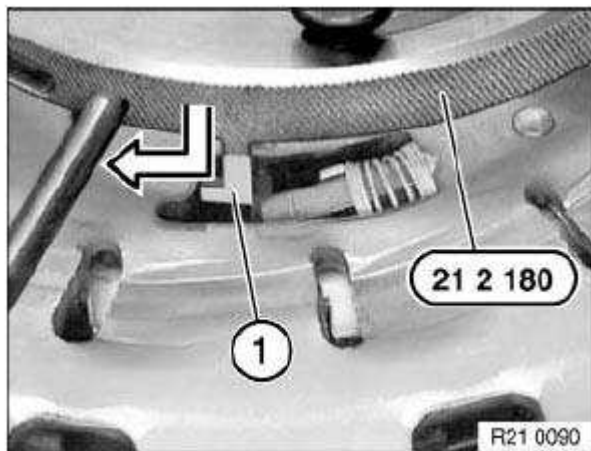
Locking Hooks Of Special Tool 21 2 180
